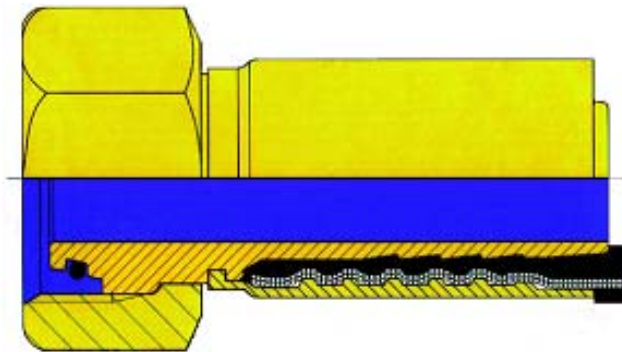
A two-piece fitting assembled onto a skive hose. Because the teeth do not have to pass through the outer cover of the hose they are shorter.
